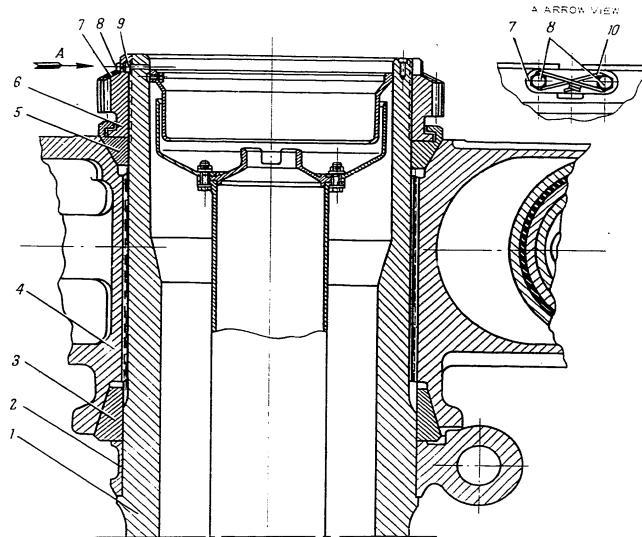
SECTIONAL VIEW OF MAIN GEAR BOX SHAFT WITH MAIN ROTOR HUB INSTALLED
